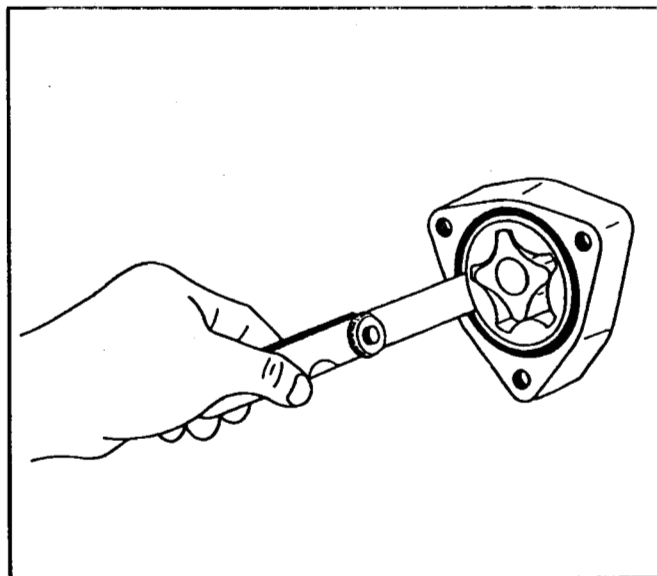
MEASURING OUTER ROTOR TO PUMP BODY CLEARANCE
